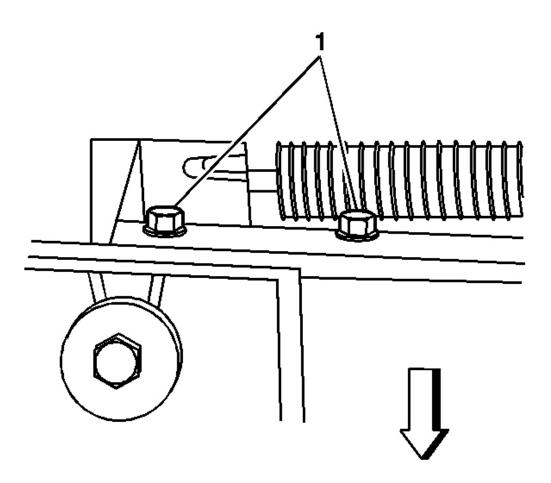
Locating Sensor-To-Frame Retaining Bolts Courtesy of GENERAL MOTORS CORP.
